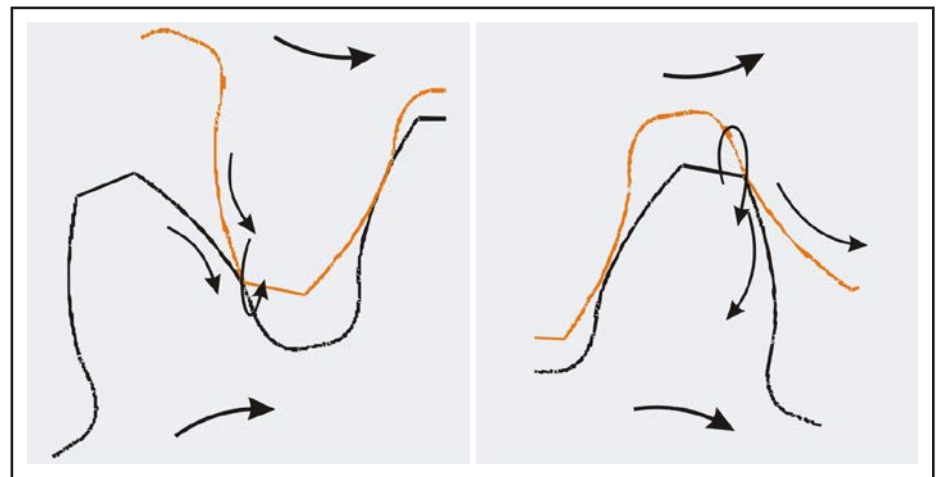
Kinematics of gear teeth: (left) at pre-engagement; (right) at post-engagement.
